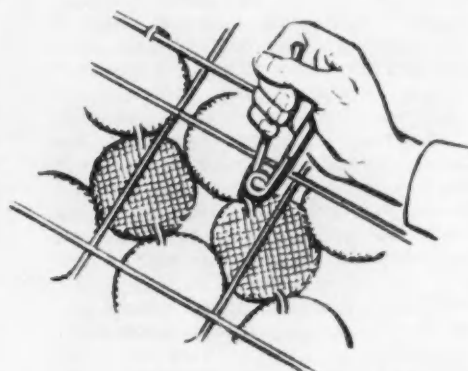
In adjusting the coil-spring seat cushion, it is advisable to hog ring each insert coil in position
